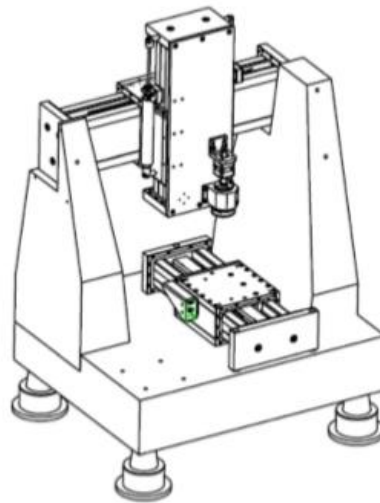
3D view of the assembled machine (more details- Appendix G)
